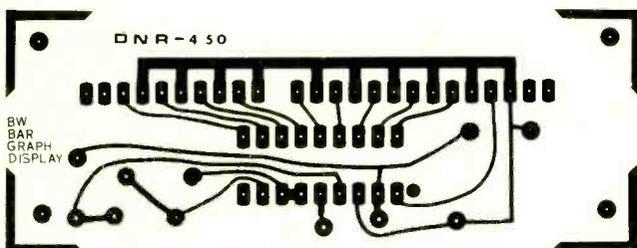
FOIL DIAGRAM for the printed-circuit board used to mount the LED display and bar-graph driver chip.
